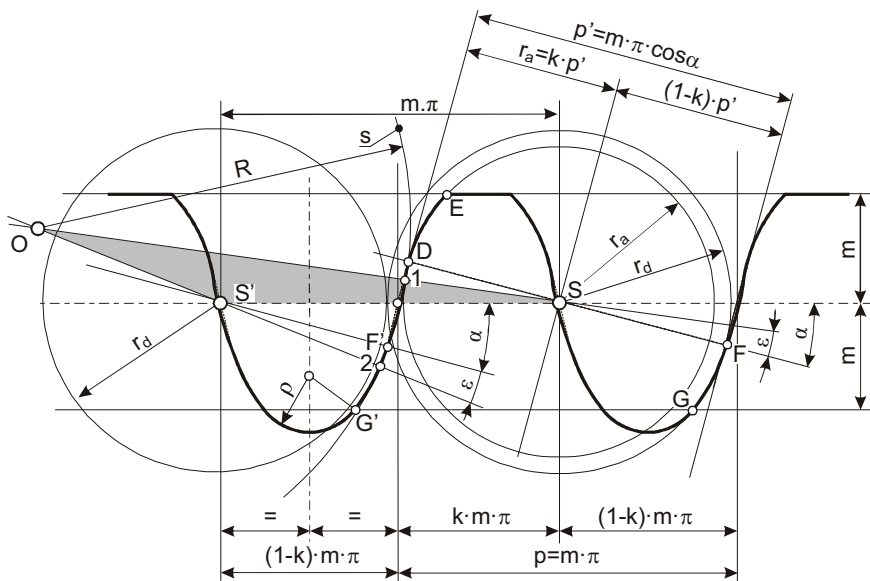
Tooth flank definition for a gear  $z = \infty$
